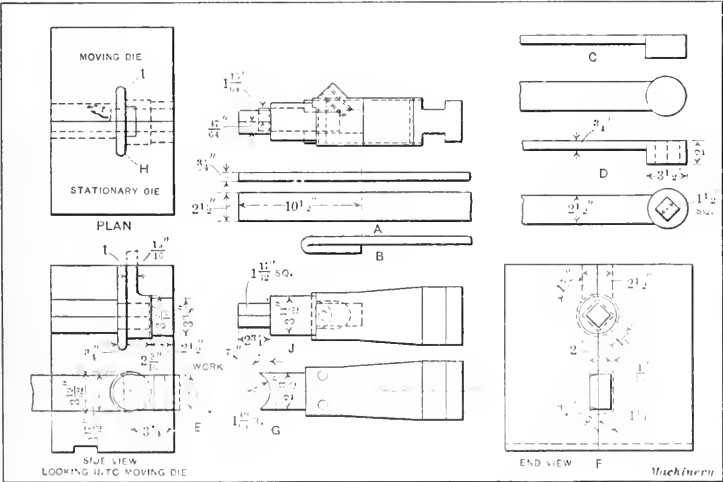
Dies and Tools used in making a Locomotive Ash-pan Handle
